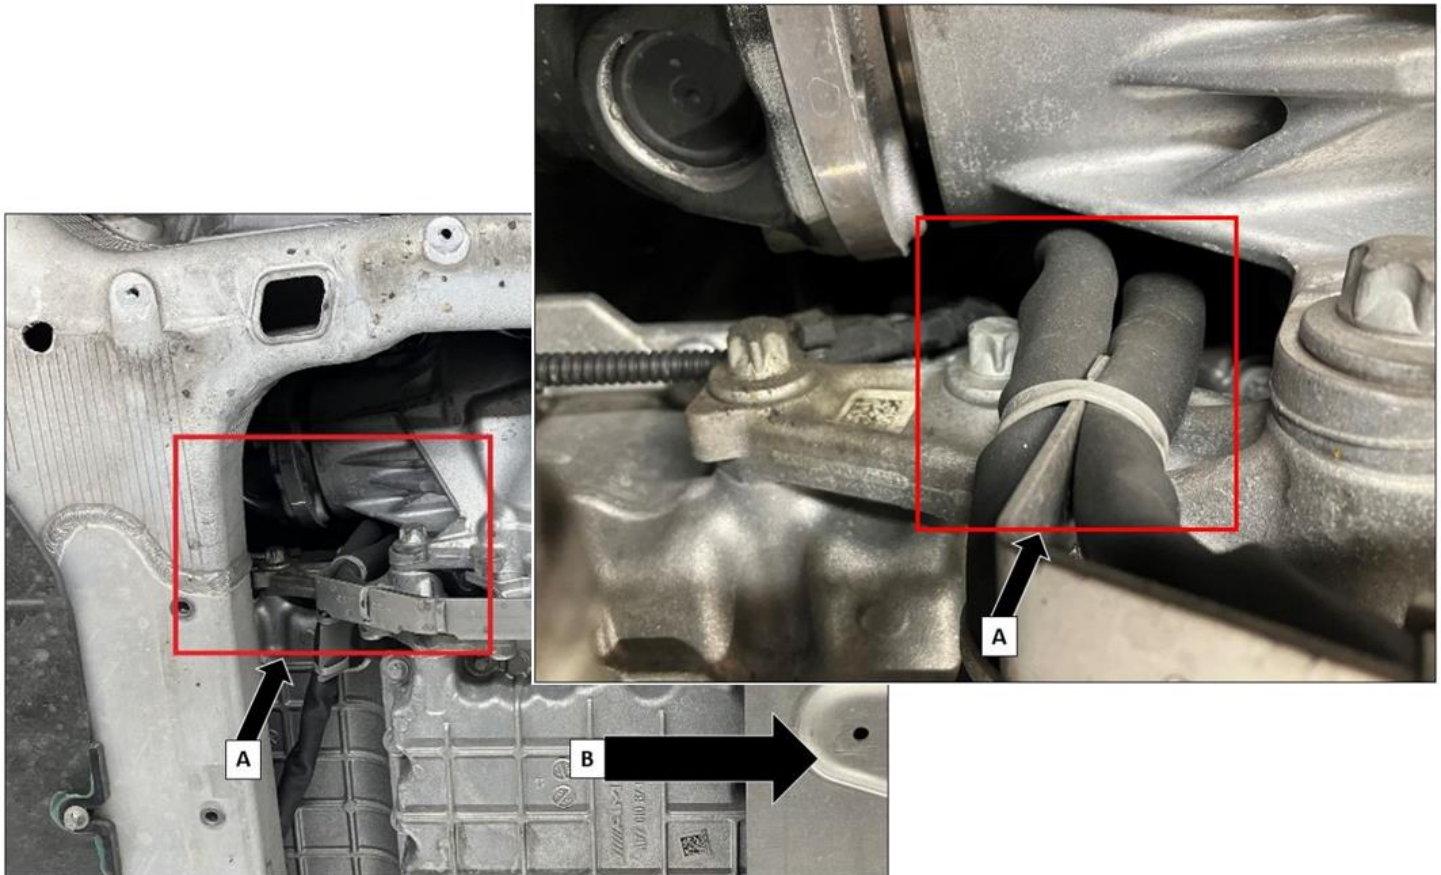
Inspect starter/alternator wiring harness near propeller shaft (arrow A), direction of travel (arrow B)
